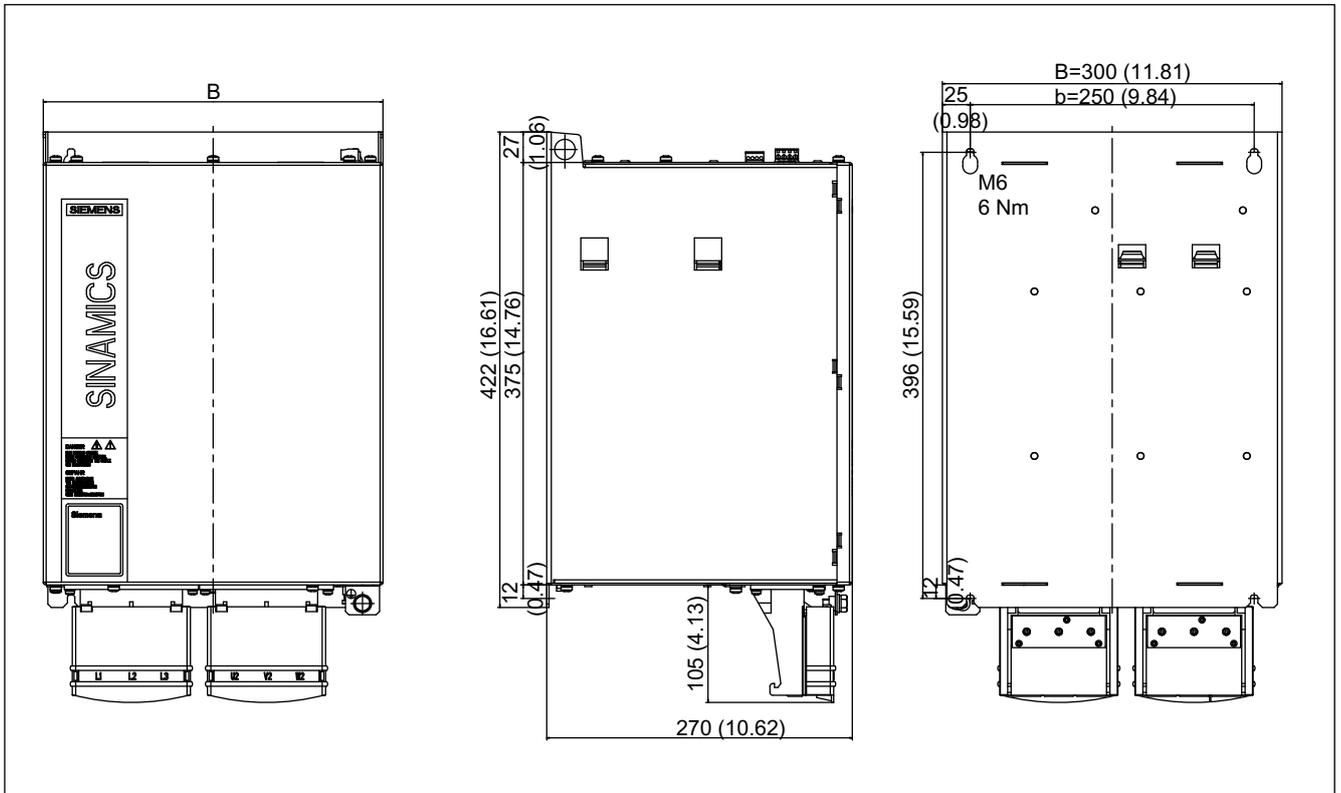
Dimension drawing: Active Interface Module (80 kW and 120 kW)
